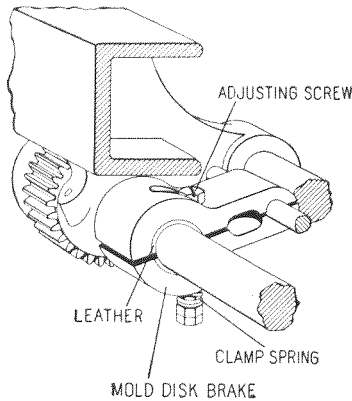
View showing the mold-disk brake with adjusting screw for holding the same for clamping it upon the shaft. The object of this brake is to prevent the momentum of the mold disk when revolving from carrying it by the proper position to go forward on the locking pins. The clamp should be adjusted so that the mold disk stops in the proper position.
